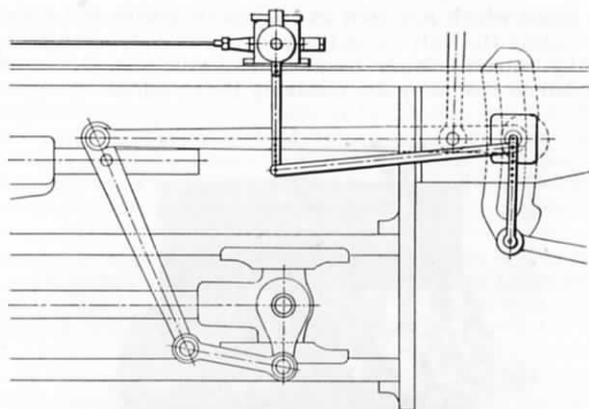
MECHANICAL LUBRICATOR DRIVEN FROM EXPANSION LINK OF WALSCHAERTS VALVE GEAR. (See also Fig. 231.)
